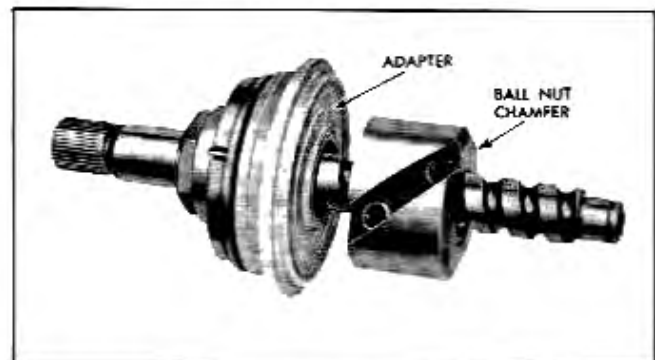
Steering Worm, Ball Nut and Adapter Assembly
